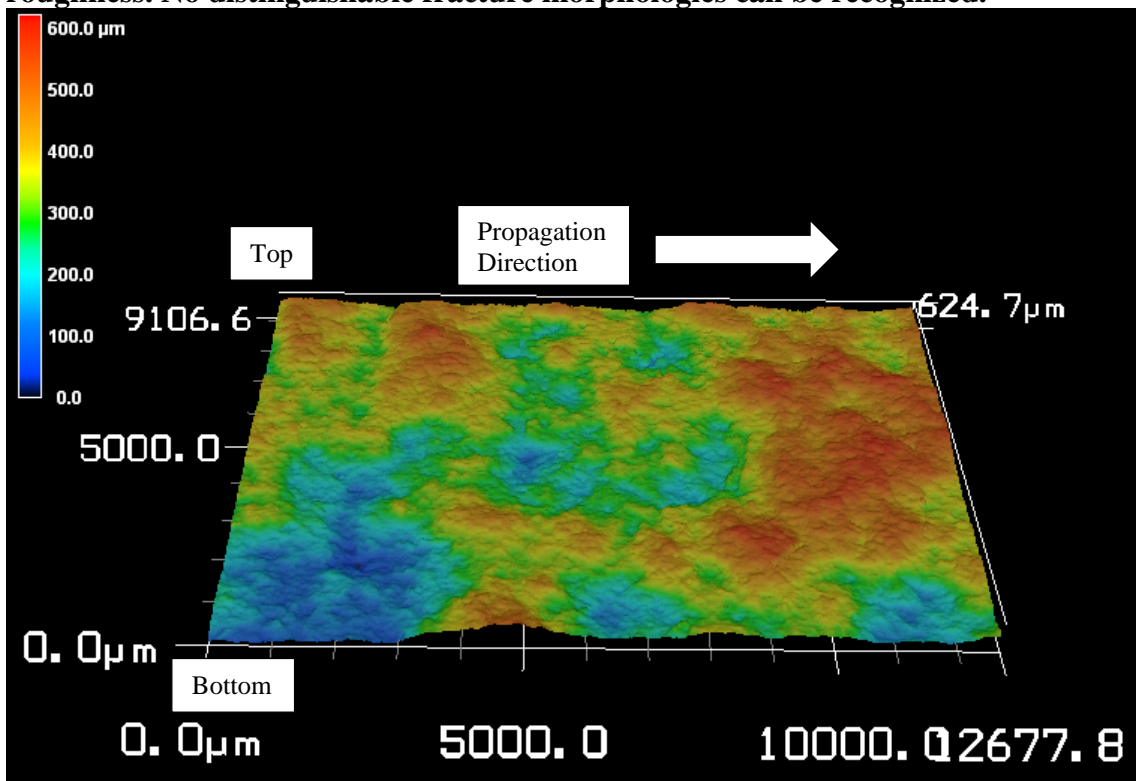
A 10x10 mm Keyence surface scan of the primary fracture RMS roughness. No distinguishable fracture morphologies can be recognized.
